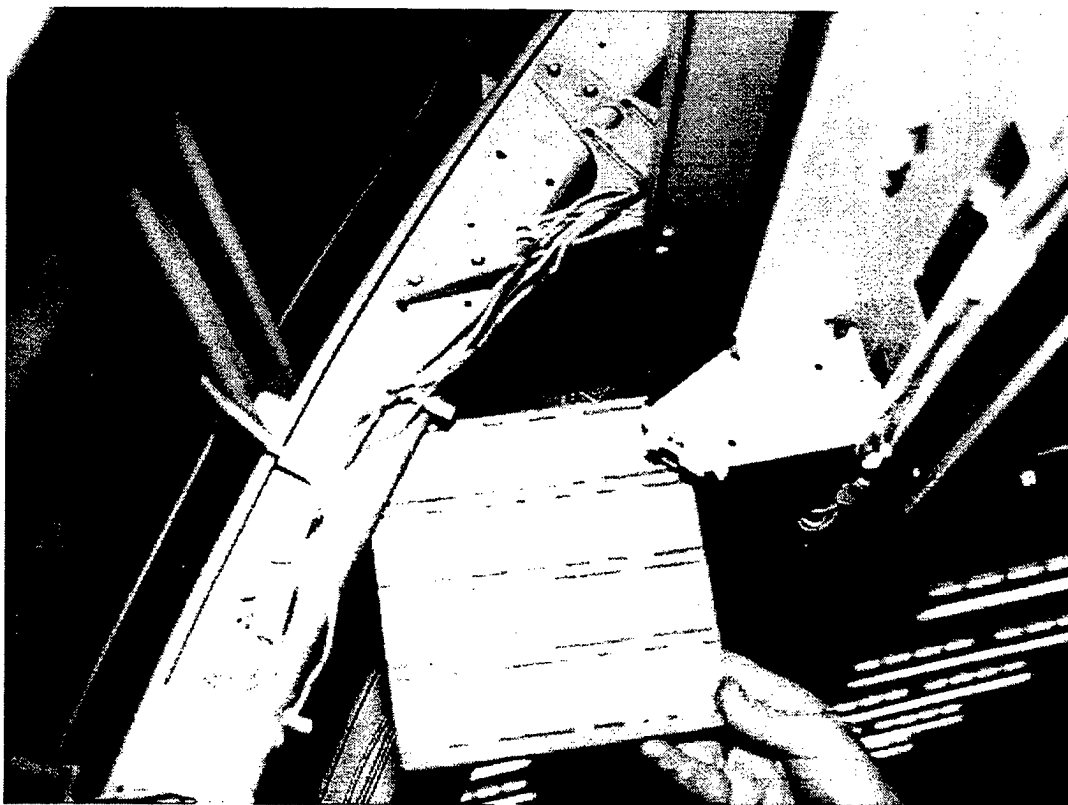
PRETEST BIN B ATTACHMENT SUPPORT NO. 7 FRONT VIEW
